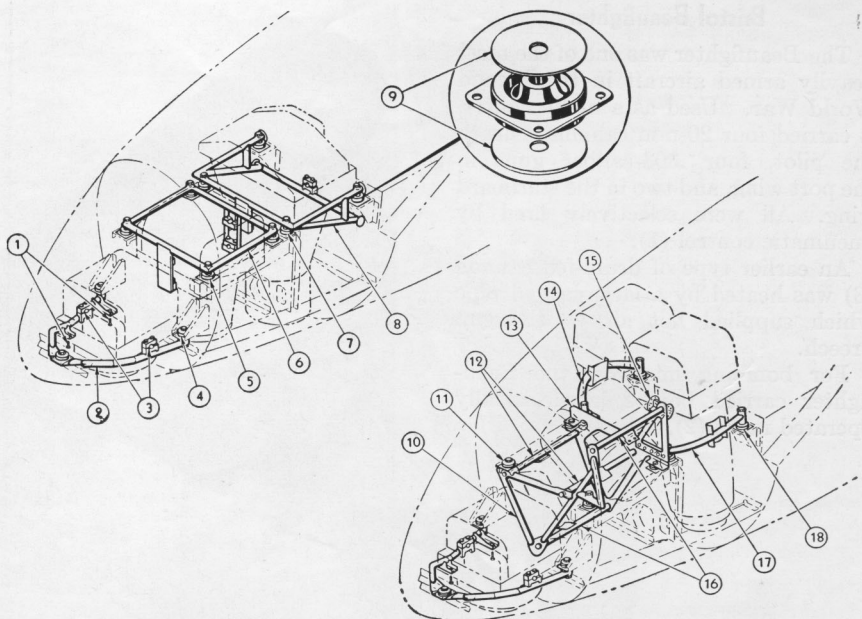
Phantom view of the camera installation on F-5B photographic version showing (1) camera setscrews; (2), (6), (8), (14), and (17) cradles, (4), (5), (7), (11), and (18) Lord mounts; (9) bumper washers; (10) and (13) truss assemblies; (12), (15), and (16) supports; (3) caps on cradles.
